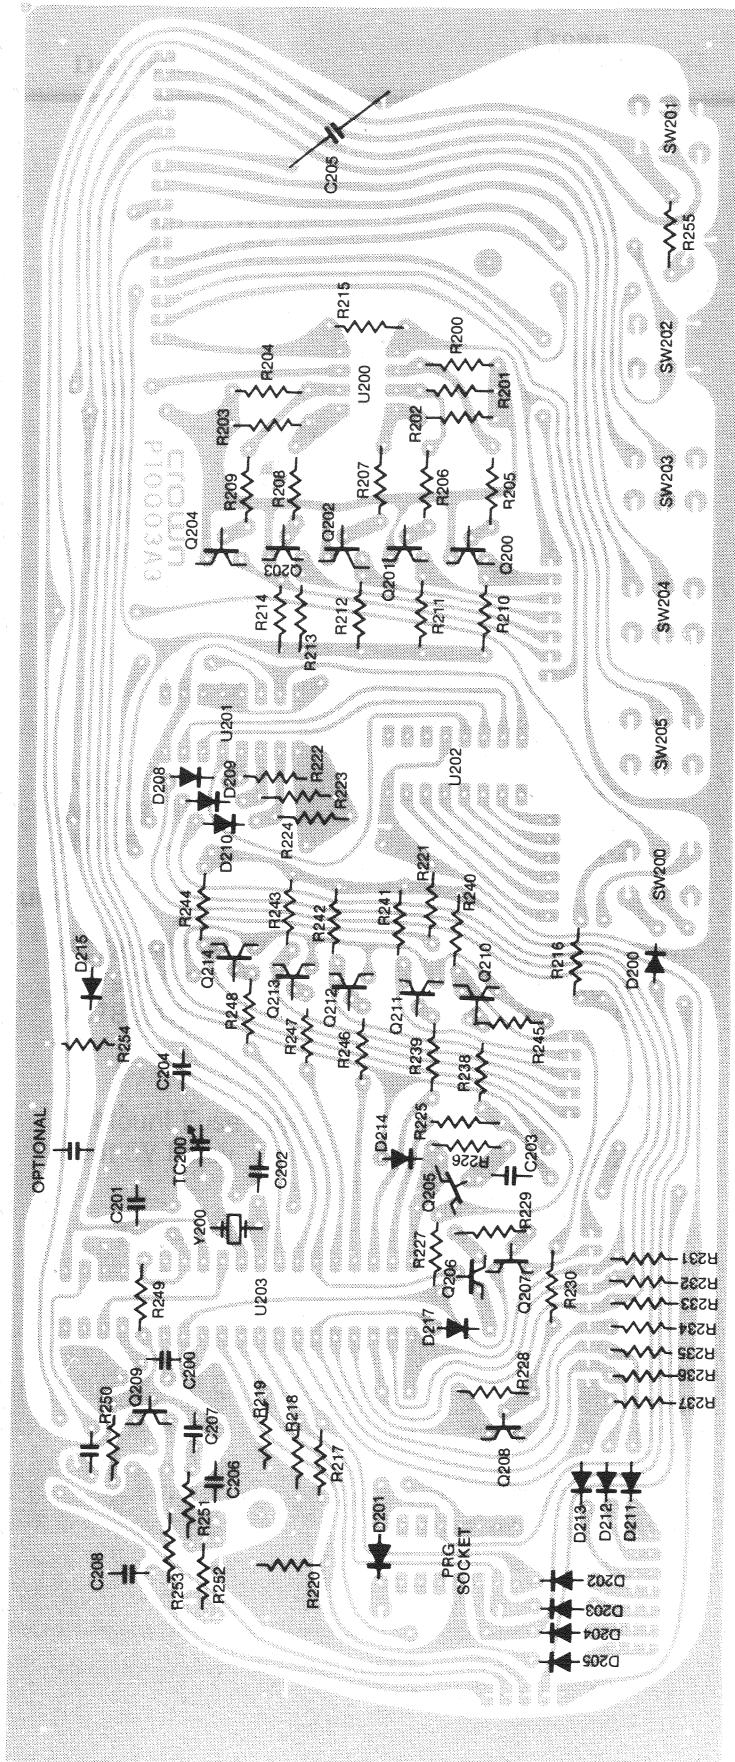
Control Module Foil Board Layout; #Q42466J4
